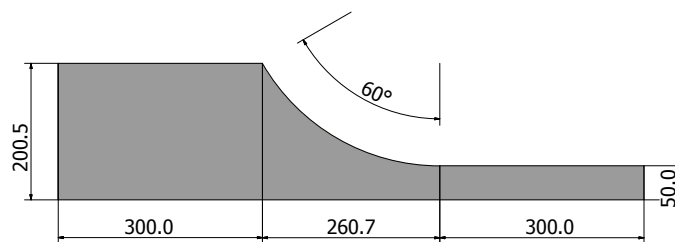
Shroud shape SS1 (dimensions are in mm)
